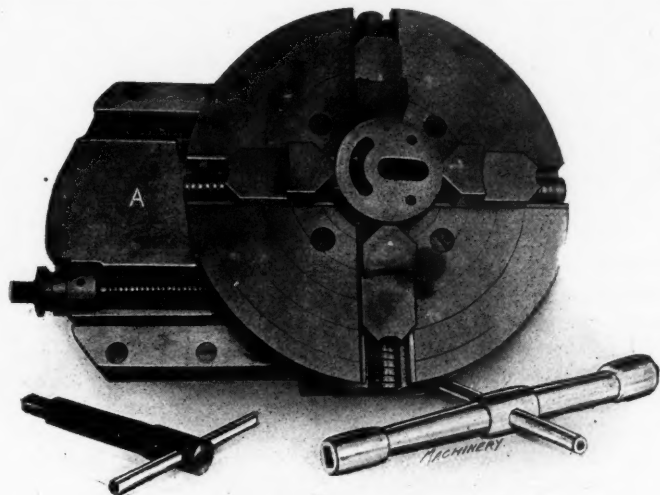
The Wennerstrom Dividing Chuck for use on the Lathe or Miller
